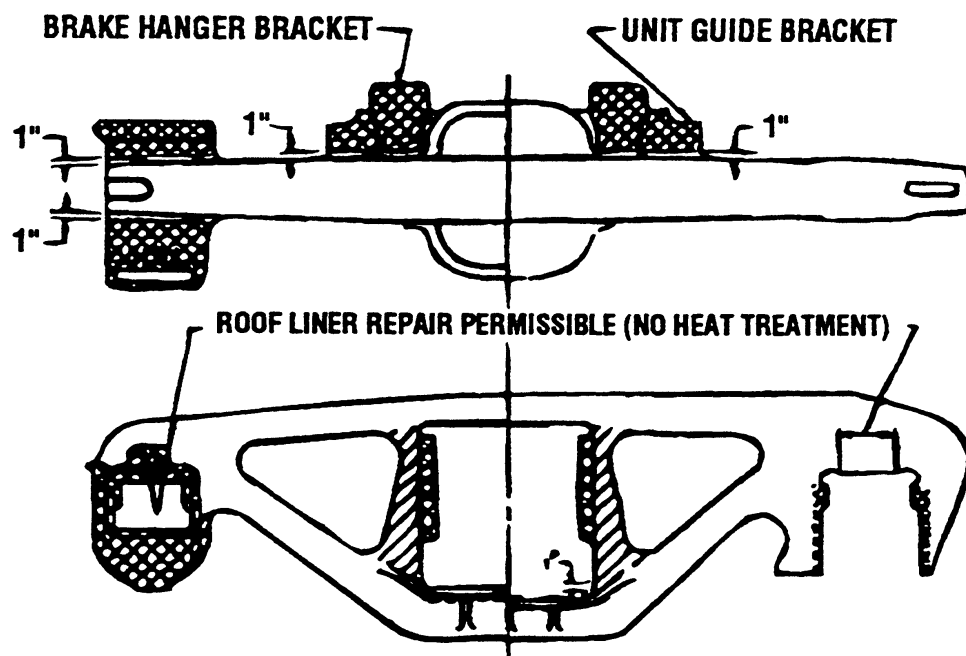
Illustration of repair welding of truck side frames.
